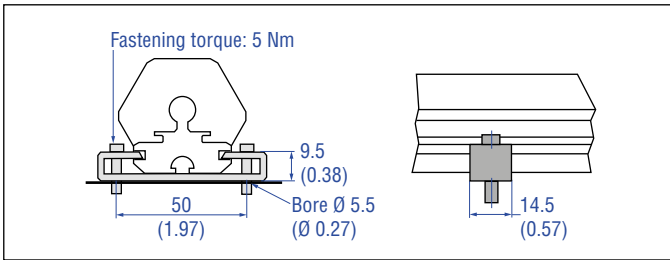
Mounting clamps (part no. 400 802) with cylinder screw M5×20
